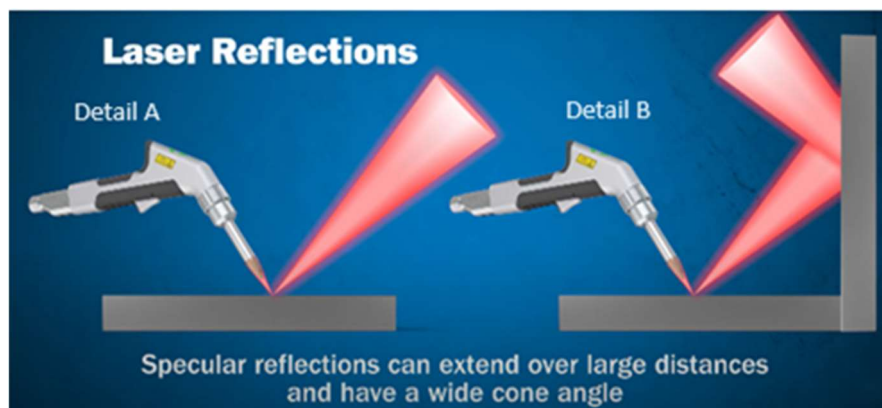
Schematic drawing showing multiple reflections during laser welding [courtesy of Miller Electric Mfg LLC, USA].
